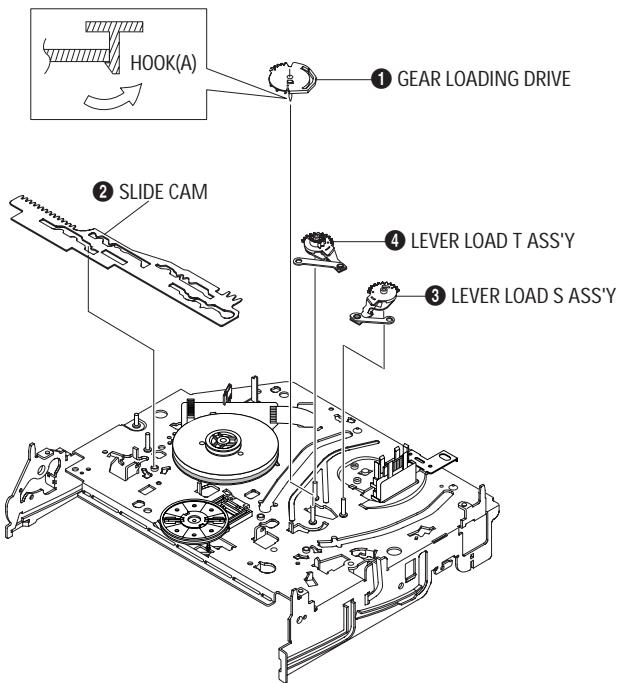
Gear Loading Drive, Slider Cam, Lever T, S Load Ass'y Removal
